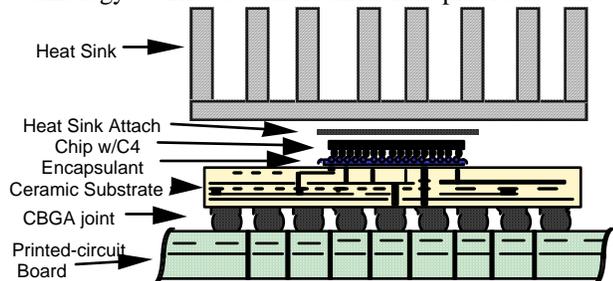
C4/Ceramic-Ball-Grid Array: Exploded Cross-sectional View with Optional Heat Sink (not to scale).
